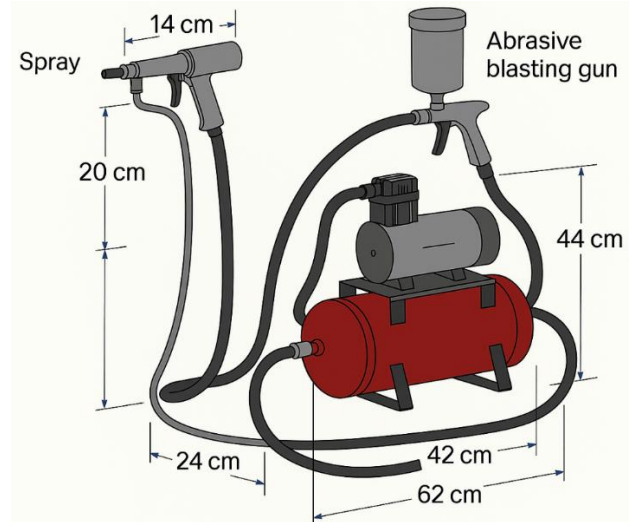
The Assembled Sandblasting Machine with Spray Gun and for Blasting
